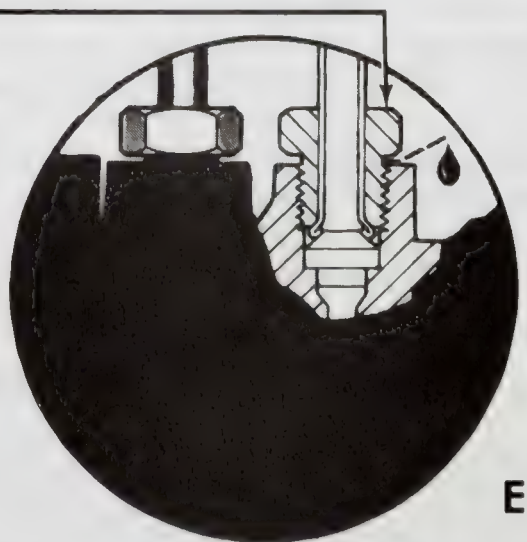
K-6 Steering Gear Leak Diagram (View B)
